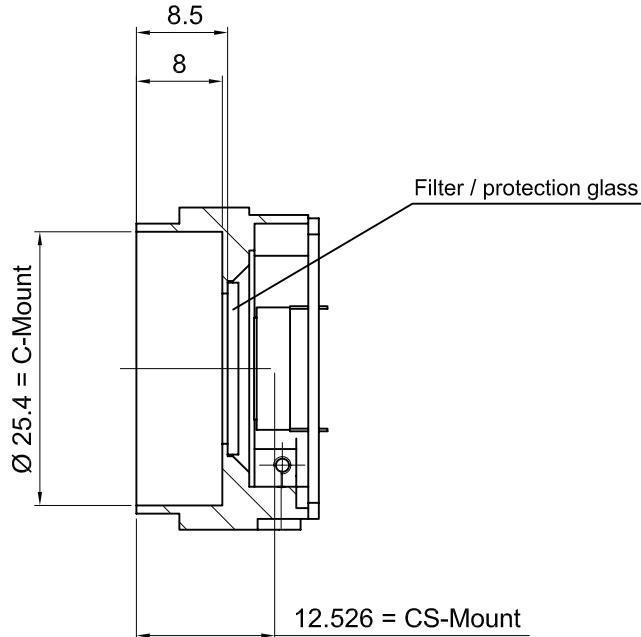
Guppy CS-Mount dimensions (old CS-/C-Mounting)
